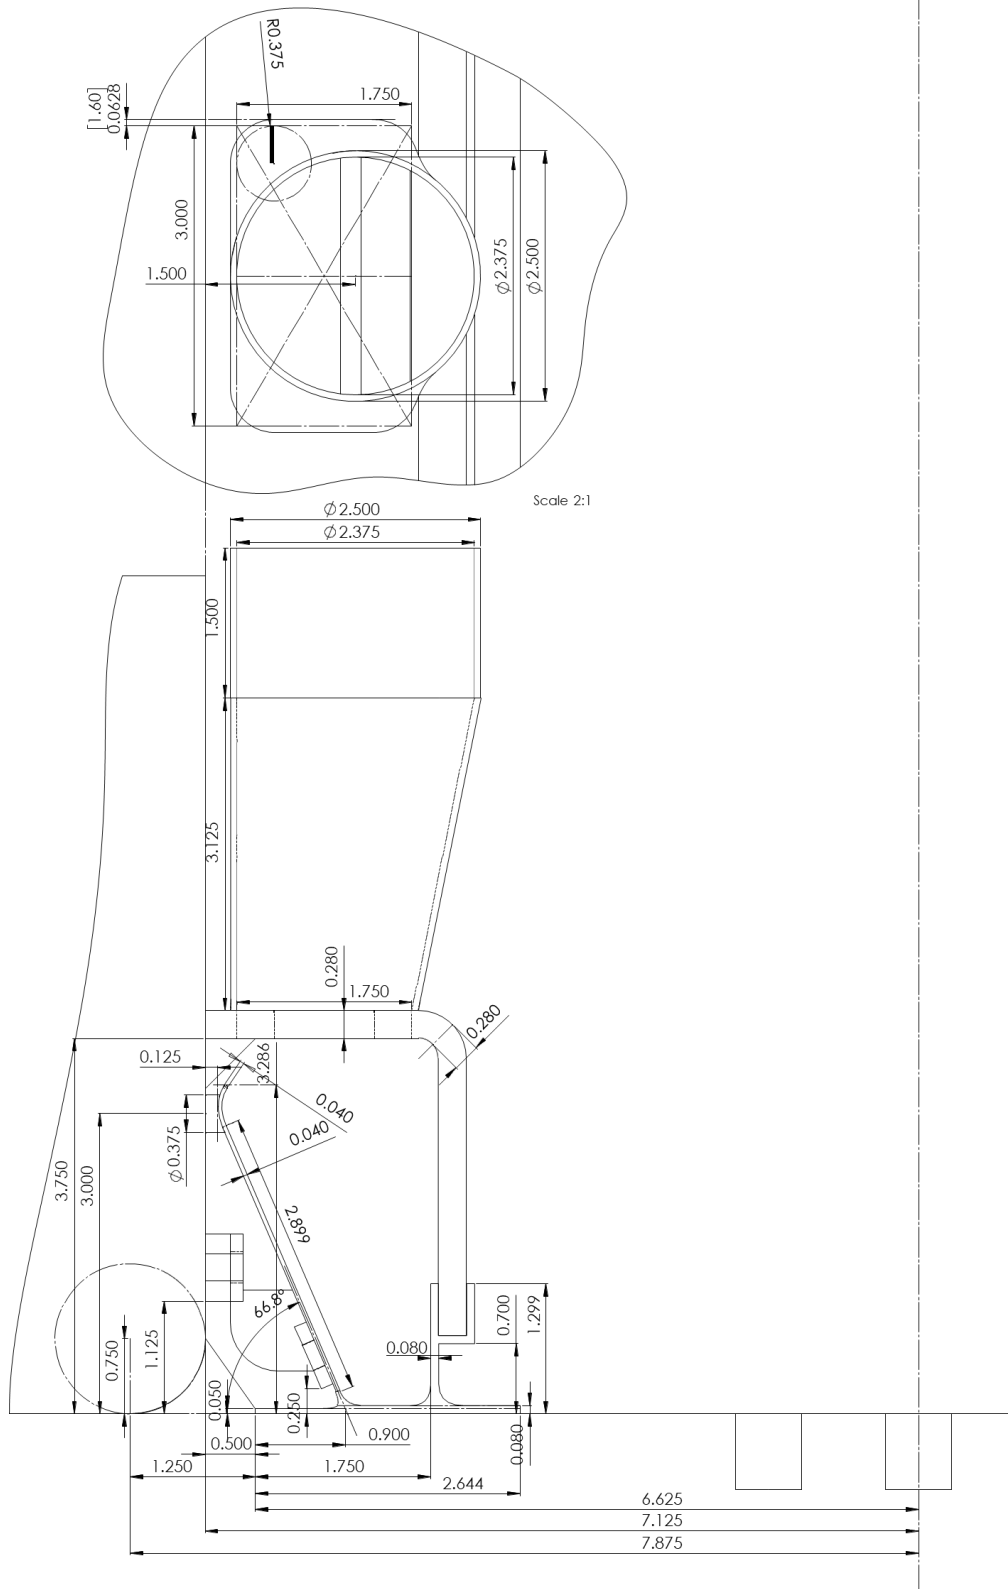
2D Drawing of diffuser frontal cross section with internal parts. Dimensions in inches.
